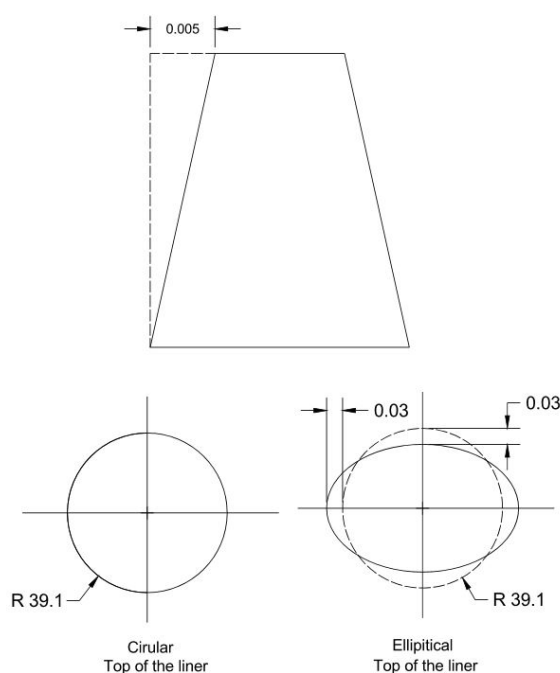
Dimensions and cross sections for conical liners (Dimensions in millimeter).
